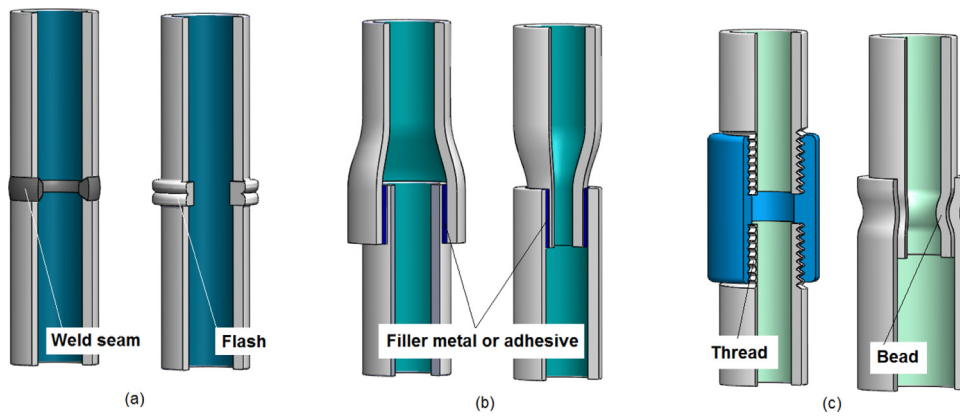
Different types of joints utilized to connect two tubes by their ends: (a) welded joints, (b) brazed and adhesive bonded joints and (c) mechanical fastened and plastically formed joints.
